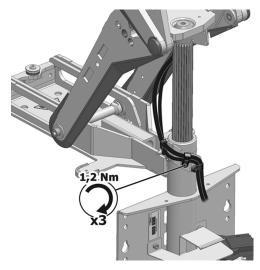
The cable is mounted with three cable brackets on the pillar, each mounted with a screw.
